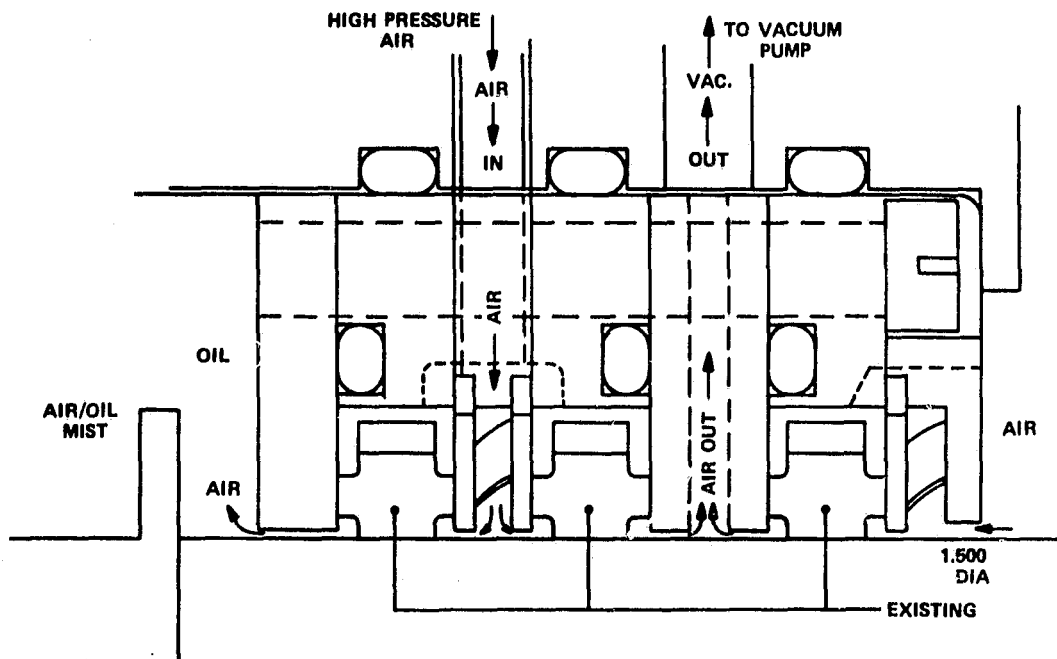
Seal Configuration for the Roller Bearing Cavity.
